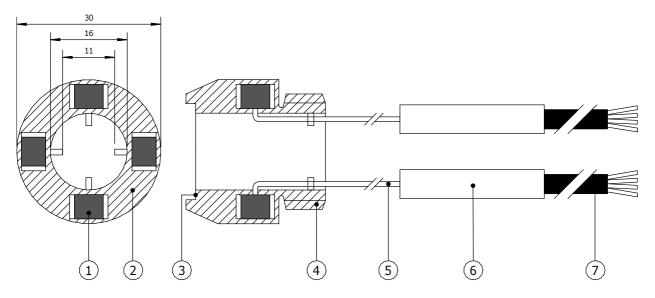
Example of RHF01 ring heat flux sensor consists of four temperature / heat flux sensors (1), in a stainless steel housing (2), with either flat connection for welding- (3) or alternatively threaded connections (4). Metal sheathed wire (5) is usually extended with PTFE wire (7). The sensor is typically incorporated in so-called deposition probes. Cooling should be provided by either air or oil. Dimensions in the drawing are only serving as example. All dimensions are in mm.
